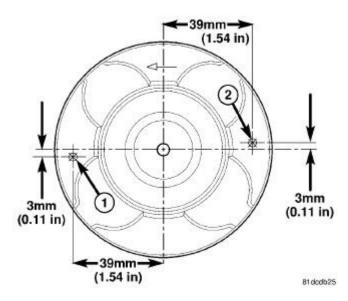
Piston Protrusion Measurement Courtesy of CHRYSLER LLC
